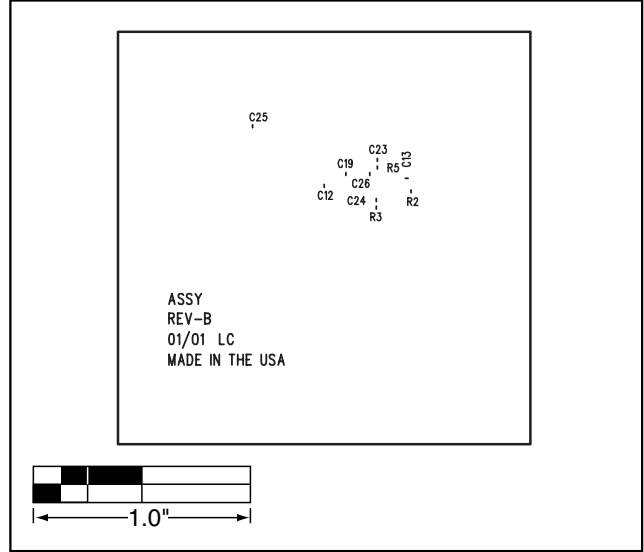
MAX2387/MAX2388/MAX2389 EV Kit Component Placement Guide—Solder Side
